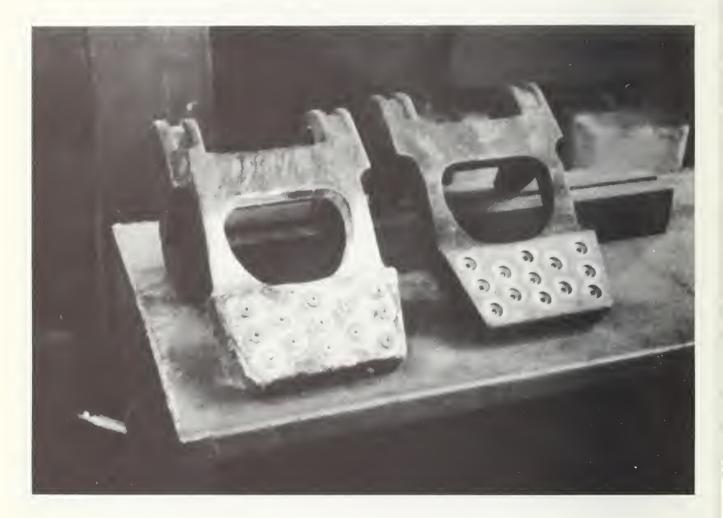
LIRR Carbide-Tipped Ice Scraper Shoes
